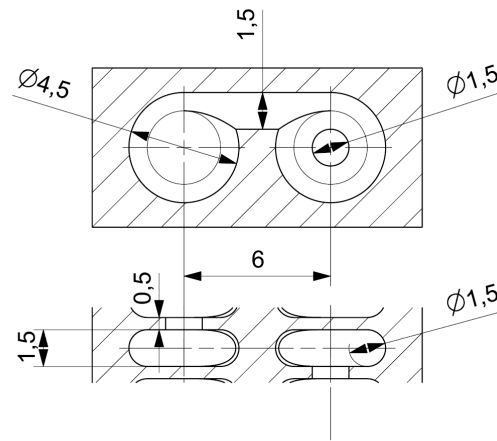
A drawing of one cell of the visco jet sample, dimensions in mm.
